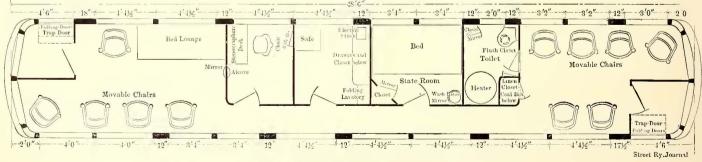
FLOOR PLAN OF PRIVATE CAR
